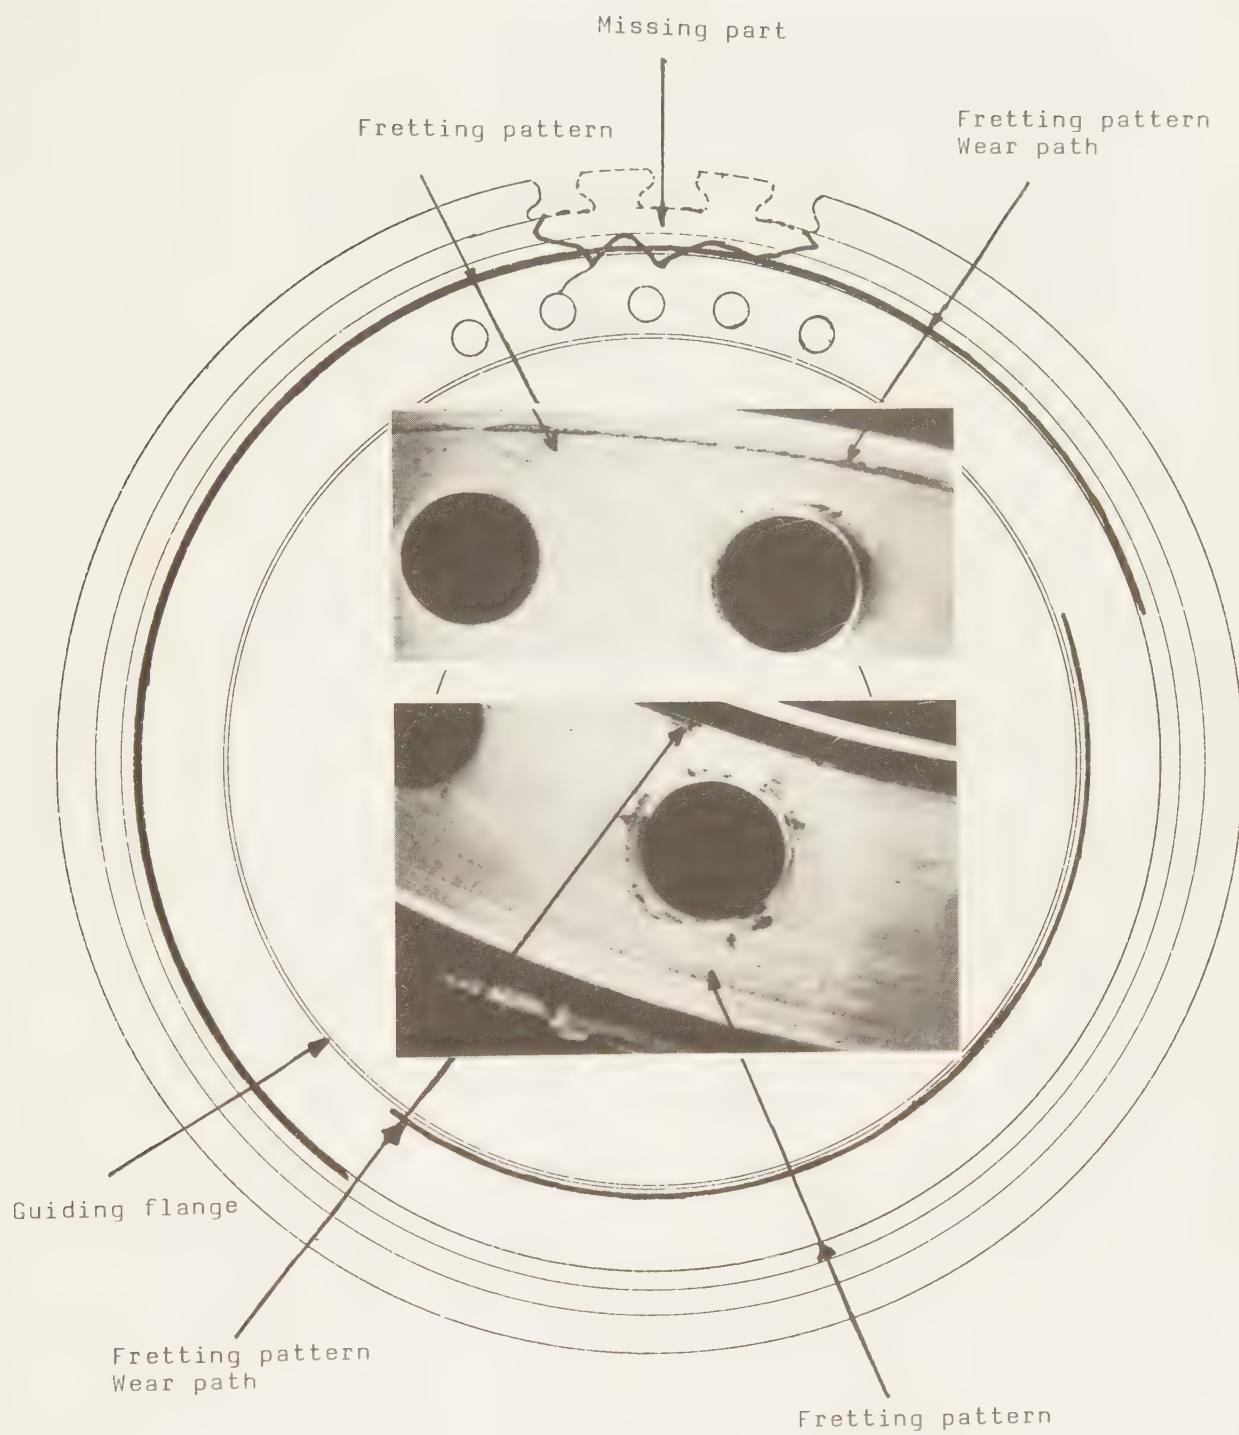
Compressor disk in Ti-6Al-4V with fretting fatigue failure.
